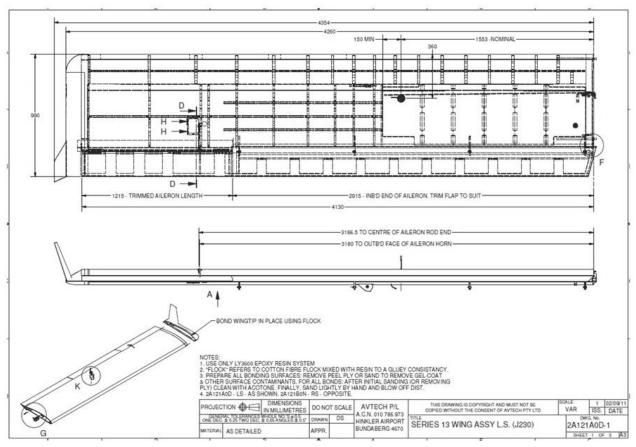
J230 Wing Assembly Sheet 1, Ser 13 (J230/J430)
